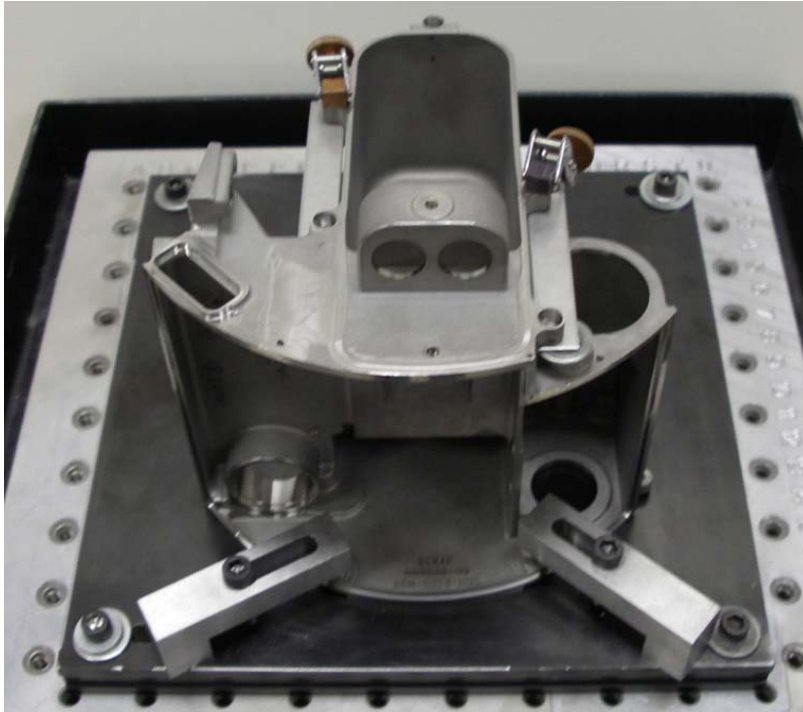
The Fixture for Repair of the Can Weld Lip and the Bolt Holes on the W87 Firing Set Housing.
